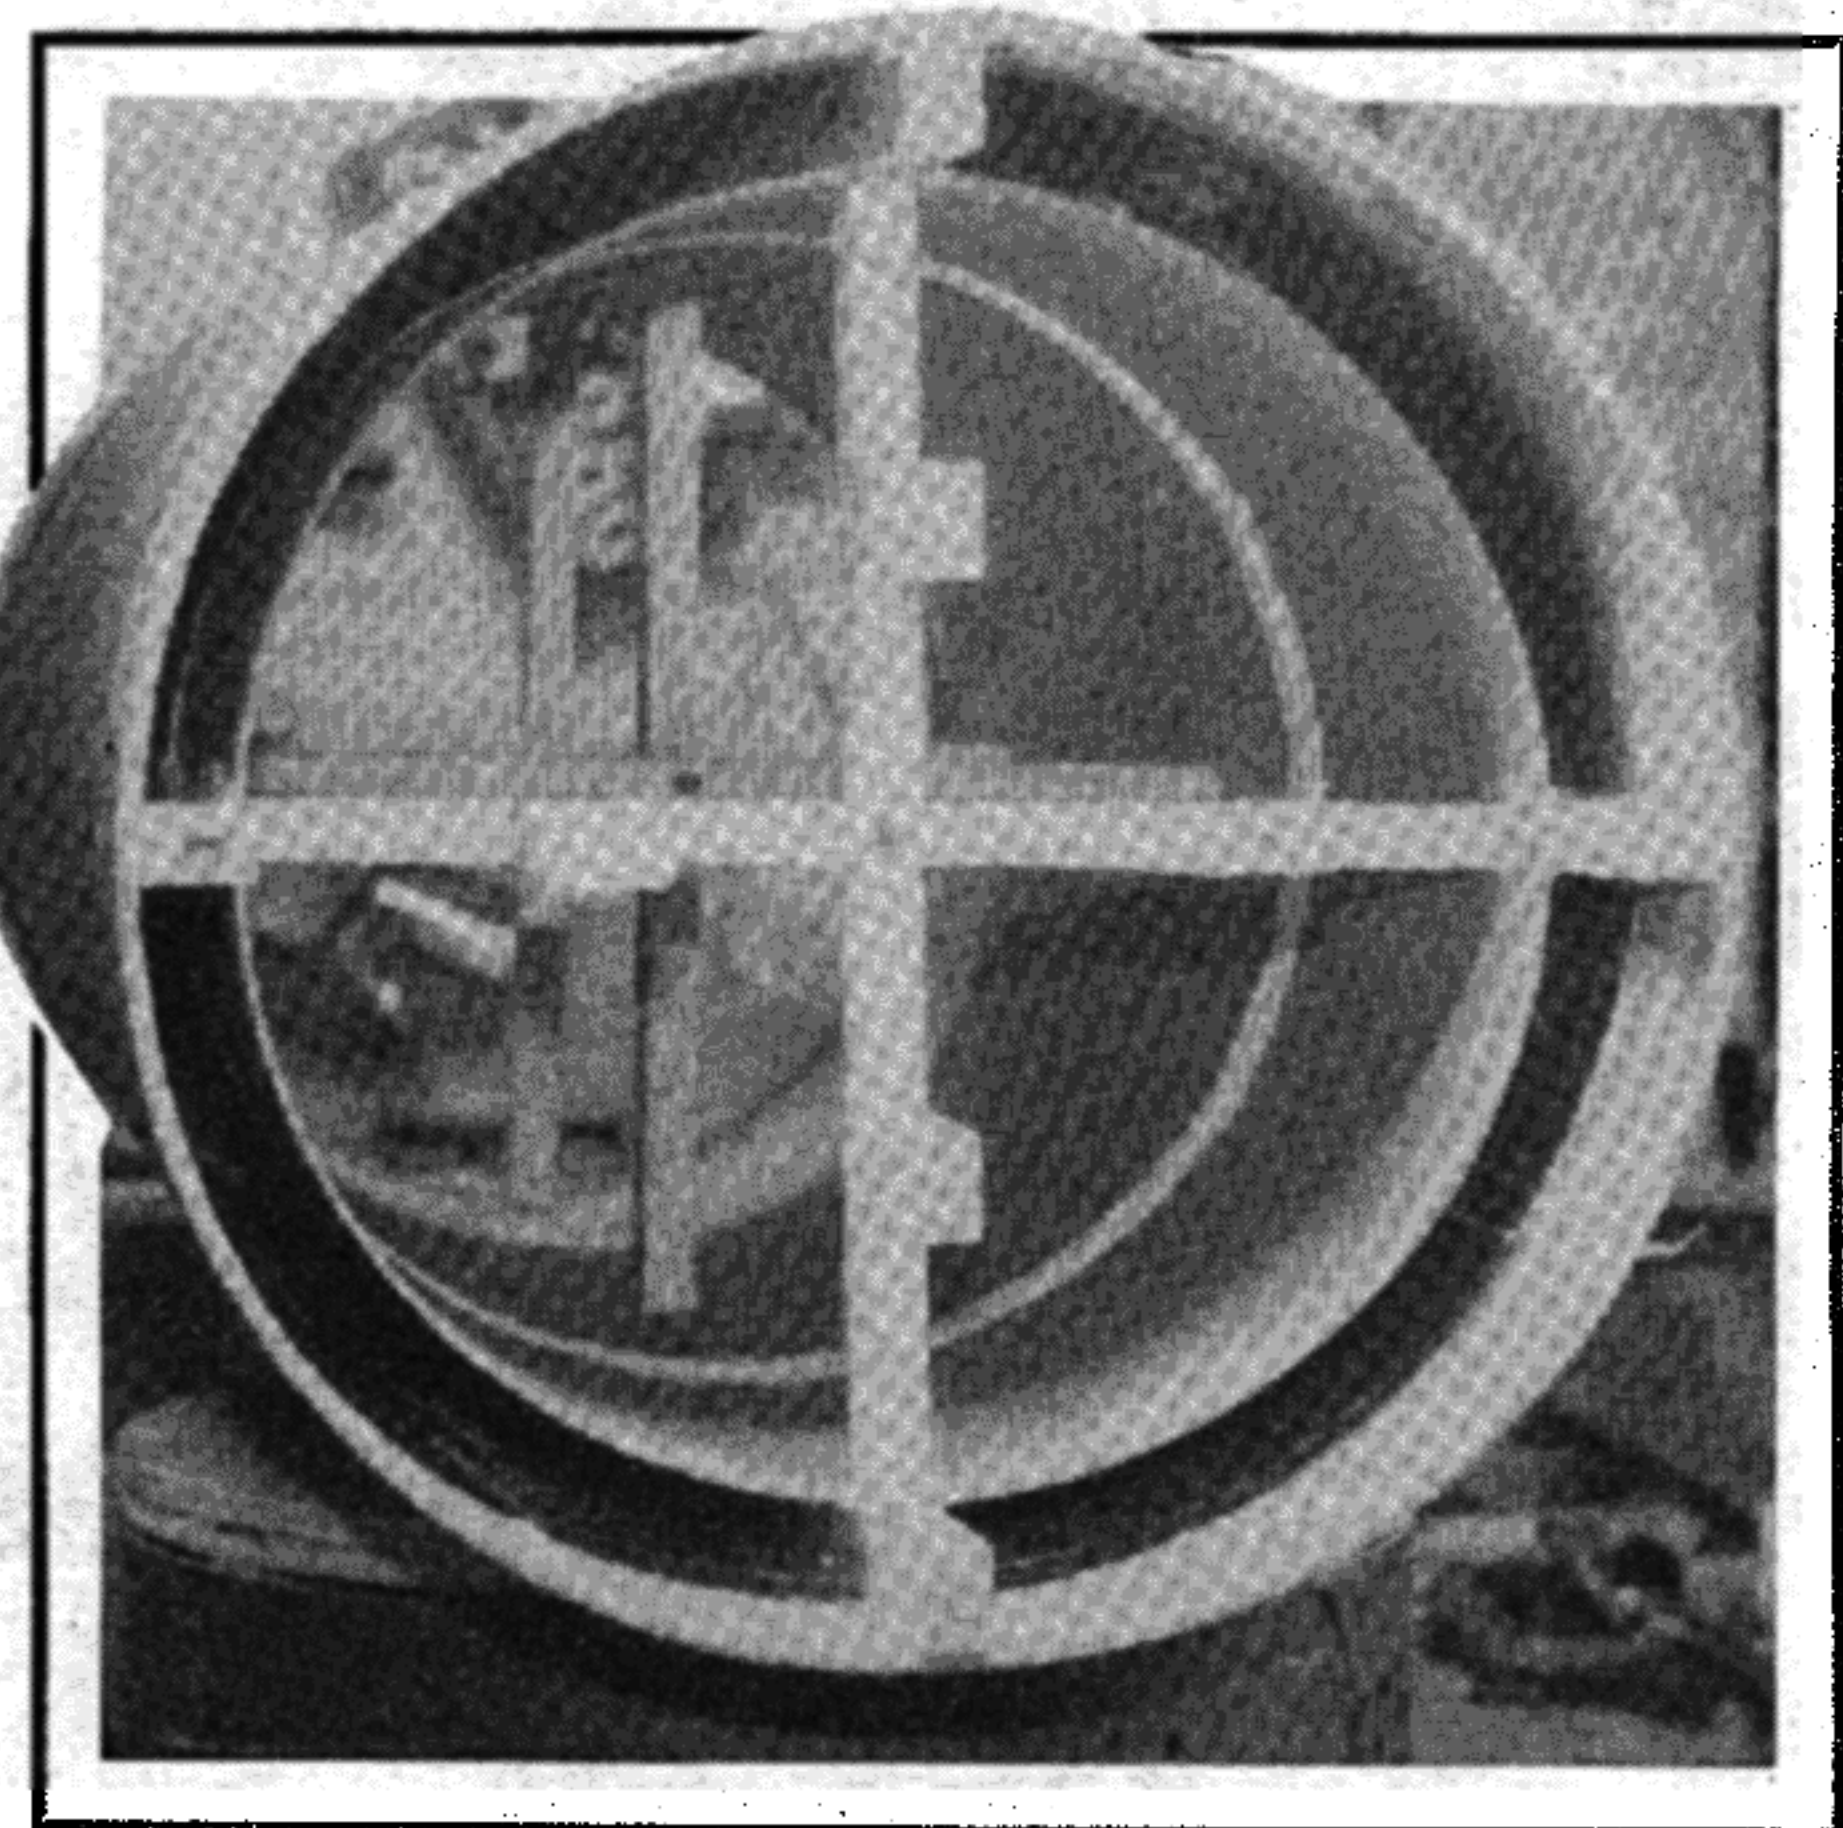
A bottom view of the interior of the cabinet after the inner tube assembly has been mounted, and the pine structural supports have been installed.
